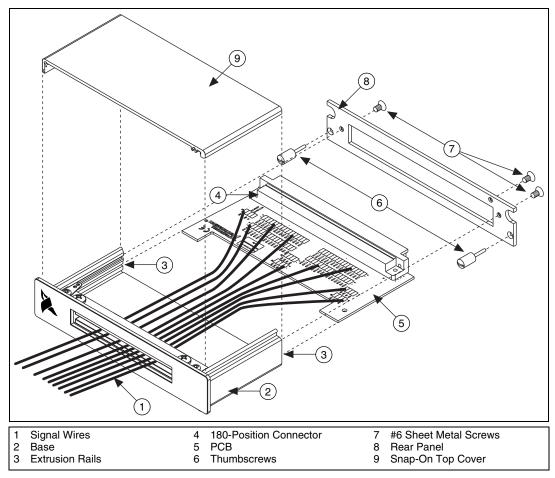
SCXI-1384K Custom Terminal Block Final Assembly
